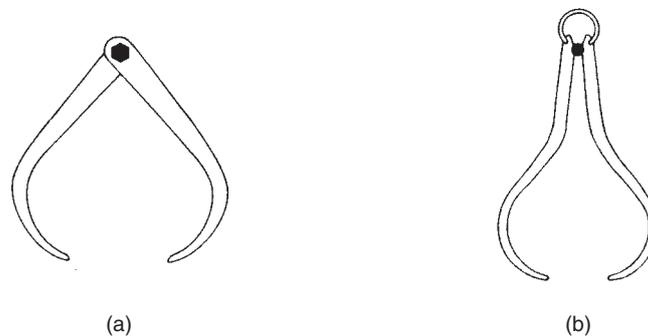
(a) Standard calliper; (b) spring-loaded calliper.
